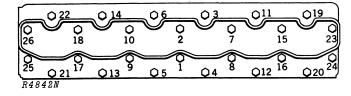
Cylinder Head Cap Screw Tightening Sequence
